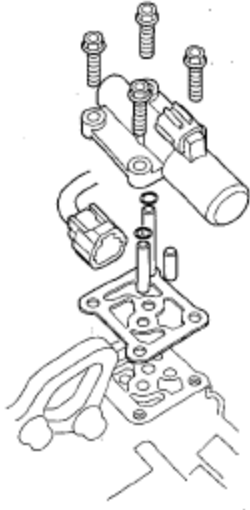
Identifying A/T Clutch Pressure Control Solenoid Valve C
